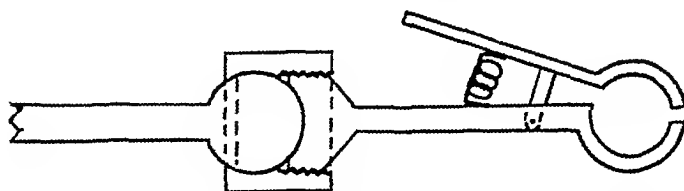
A drawing showing the mechanism of the spring clip needle holder and the universal joint which is locked by the threaded collar.
